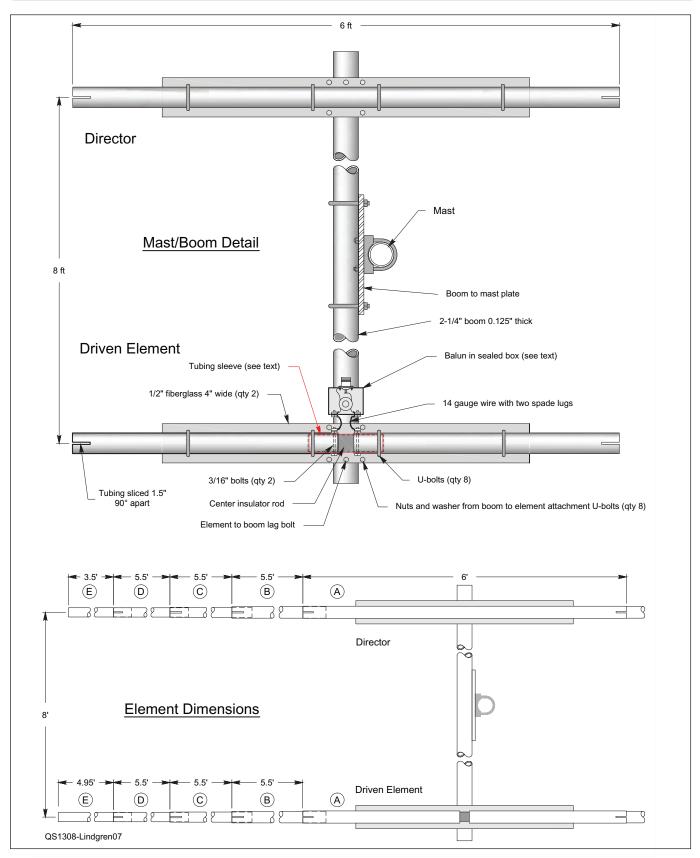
Dimensions and assembly details of the 30 meter Yagi. Cycle 24 tubes from www.cycle-24.com, McMaster-Carr parts from www.mcmaster.com.
